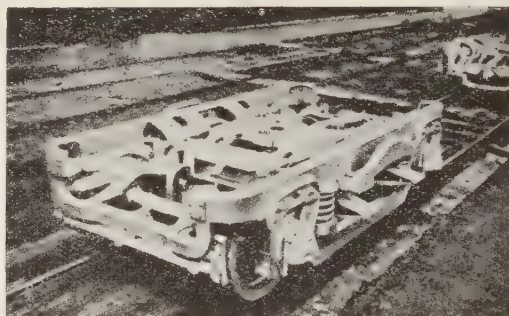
Bogie of American Pullman Company's aluminium sleeping car. The frame is a monoblock aluminium casting.
